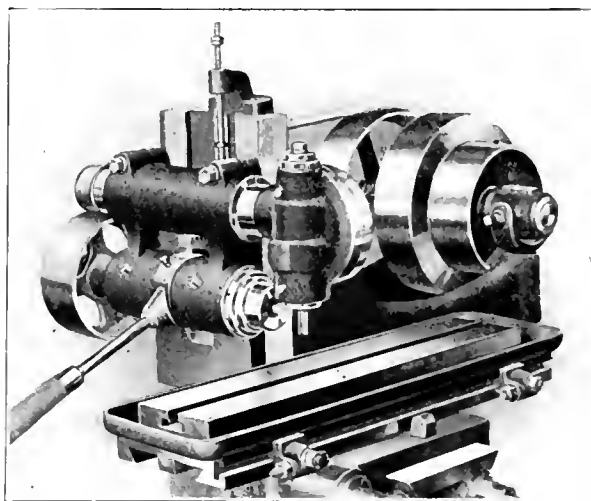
Vertical Attachment for Whitney Hand Milling Machine.
